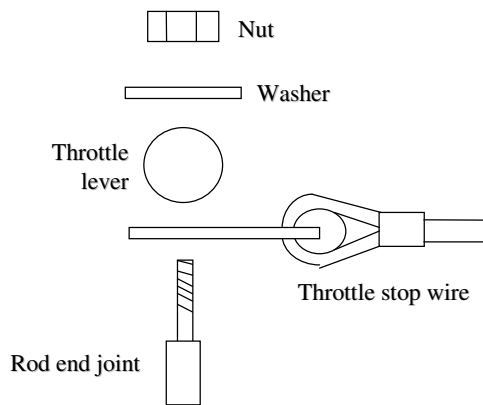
Left hand throttle lever stop fixing with throttle cable rod end joint.
